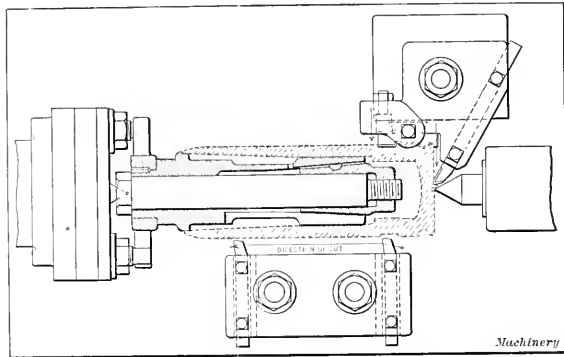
Combination Threaded and Expanding Arbor for holding Shrapnel Shell in Lathe
